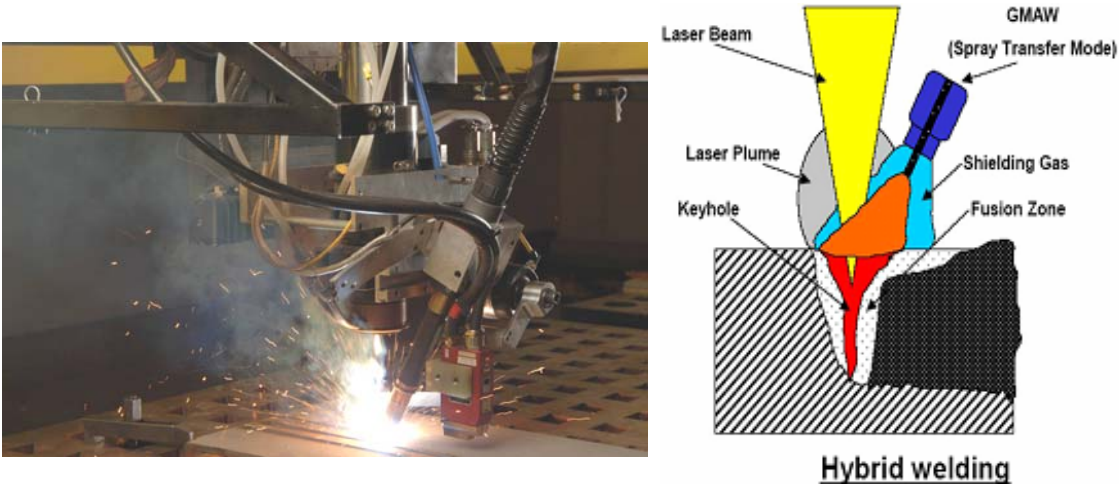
Hybrid Laser Arc Welding (HLAW) (Abbot et al. 2008)
